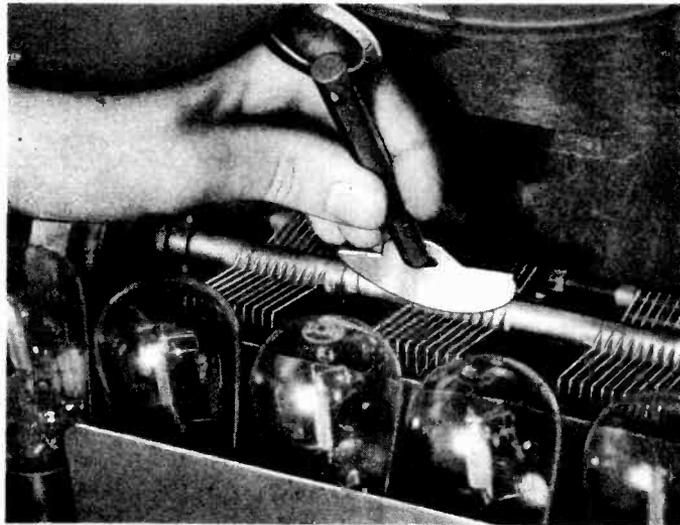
Checking condenser alignment in the three-gang tuning condenser assembly
